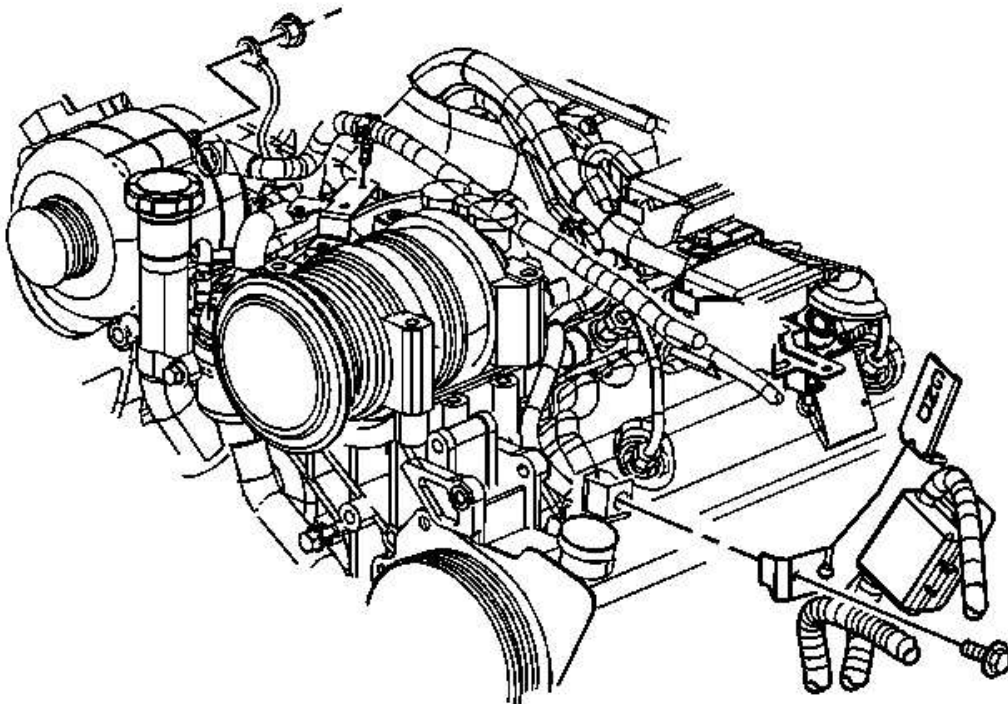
View of Generator Harness, Clip, A/C Refrigerant Switch, Dual Generator Harness Connector & A/C Compressor Clutch
